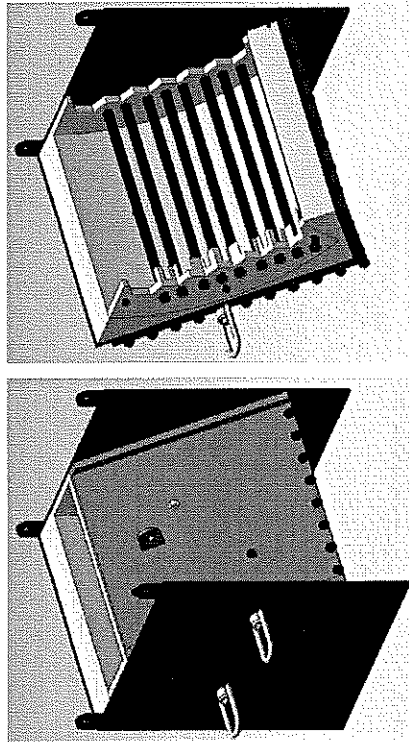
RENDER OF THIS PSR MOLD IN THE "9 HEATER" CONFIGURATION: FULL ASSEMBLY (LEFT) AND FRAME WALL, MOLD CAP, AND INSIDE PLATE REMOVED FOR CLARITY (RIGHT).
